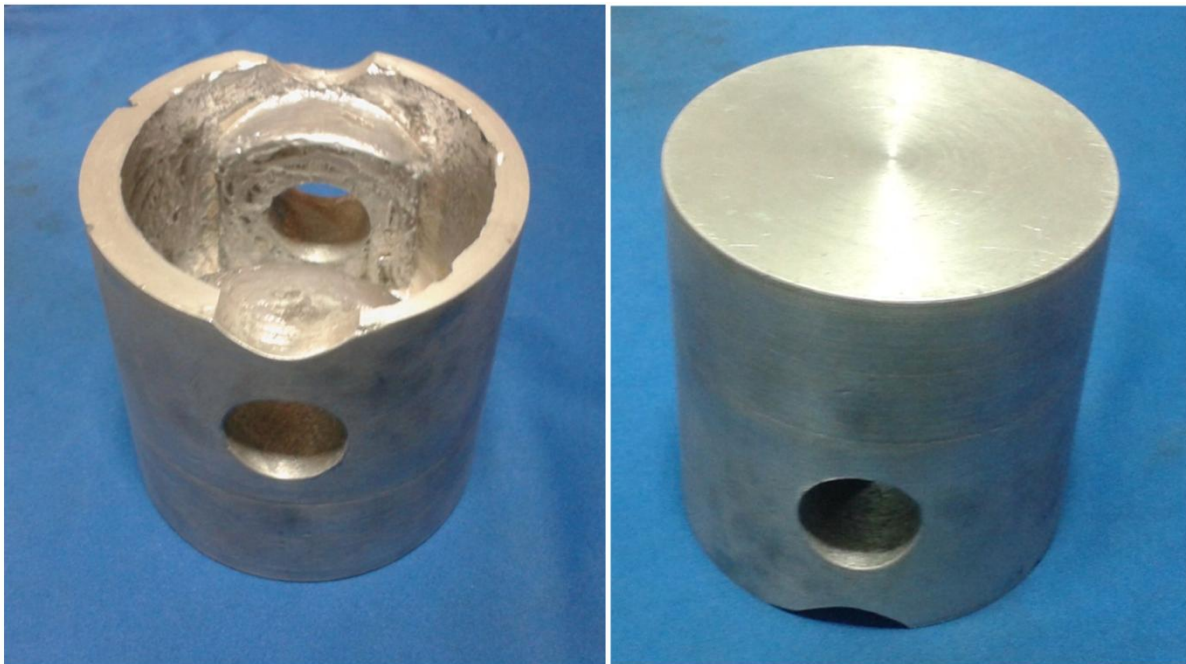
The pair of pistons (surface cleaned) produced in a single casting process
